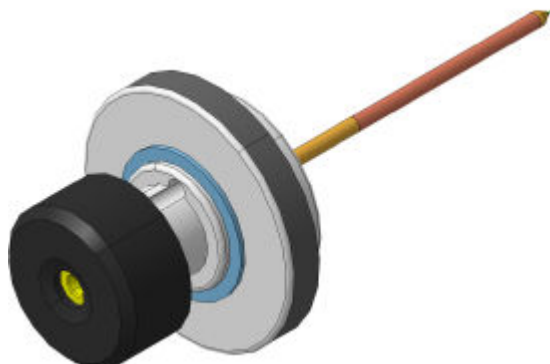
TurbolonSpray Probe Assembly (PN 5060806)
